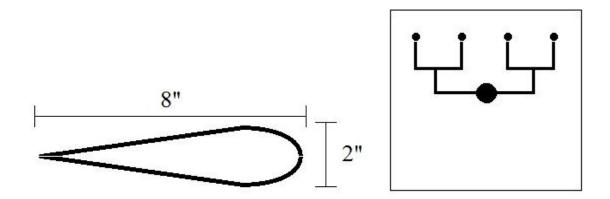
Airfoil - side view (left), Airfoil - internal manifold design (right)
